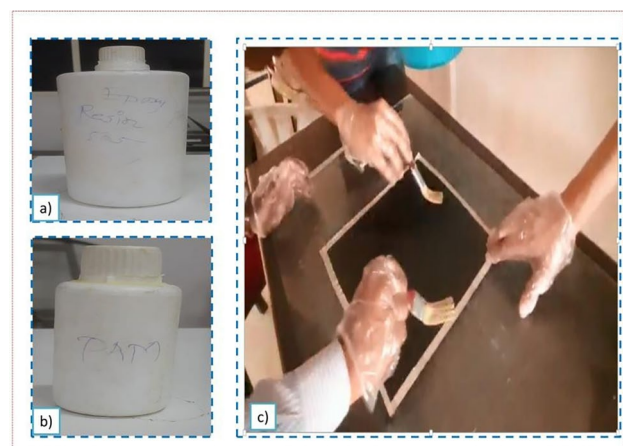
Hand-layup Process: a Matrix material, b hardener, c Lay-up process
